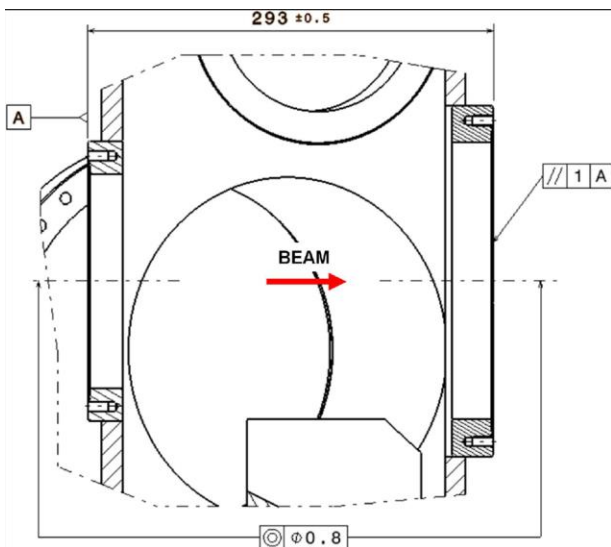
Tolerance requirements in the vacuum chamber.
